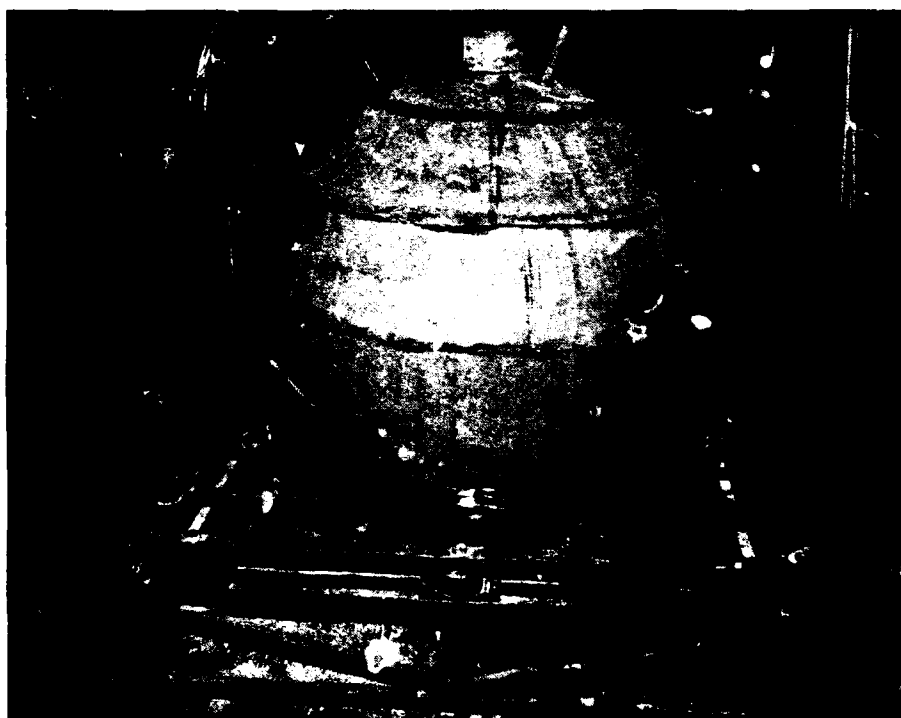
Isostatic pressing mold for 26-inch housing alumina hemispherical end closures.
